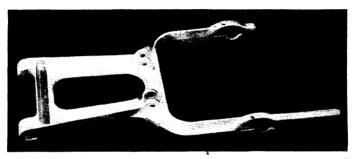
Take-up bobbin for textile machine die-cast of magnesium. Such castings are being increasingly applied to machines in which low inertia of moving components is important. In magnesium, this part weighs 0.670 lb; in aluminum, 0.974 lb.
